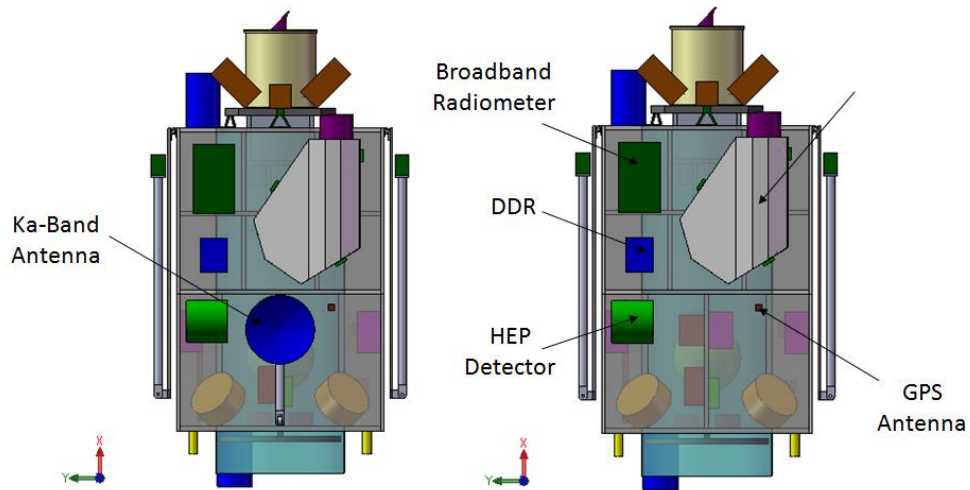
Z+ side view of GSST satellite, showing equipment layout for OPC3-2.
